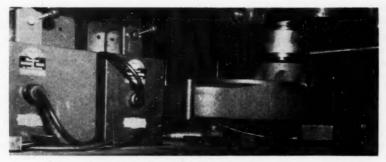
Magnetic chuck holding large cast iron cylinder head on table of planer type milling machine. Chuck is under work piece; two end stops hold piece rigid and prevent possible sliding.
